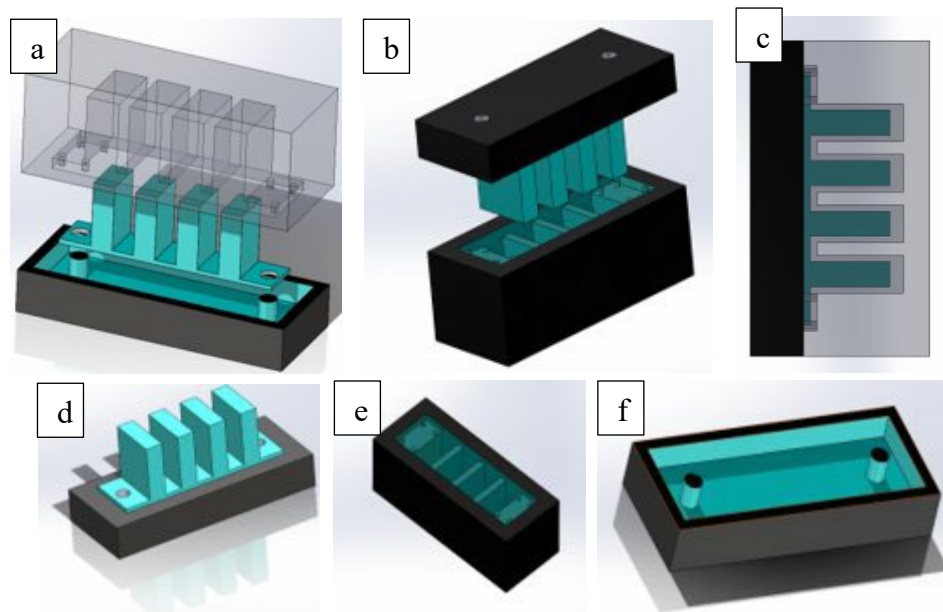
Soft actuator bellow (a) Complete configuration design (b) Upper mold configuration (c) Thickness of top of bellow design (d) Upper bellow mold base part (e) Upper bellow mold top part (f) Lower bellow mold base plate
